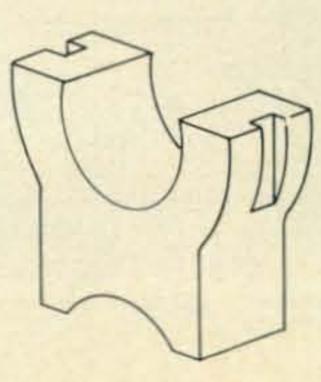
A view and drawing of the wooden blocks used to secure the center loading coil to the antenna support mounted on the Nu Rail cross.
